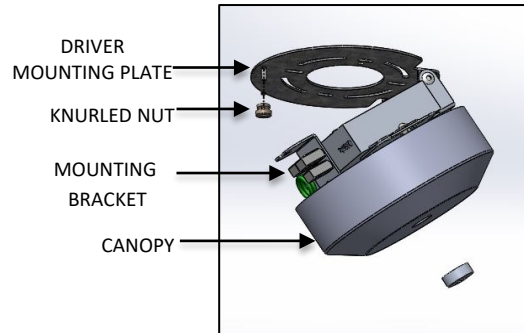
MOUNTING PLATE DIS-ASSEMBLY
